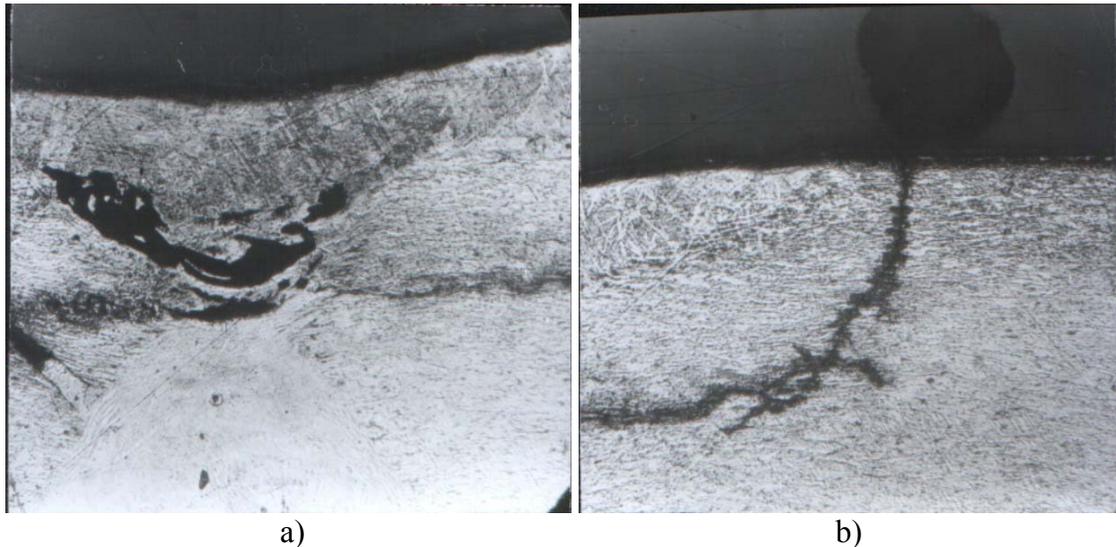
Microstructures of but joint after laser welding of 1 mm strip from 585 gold alloy:
